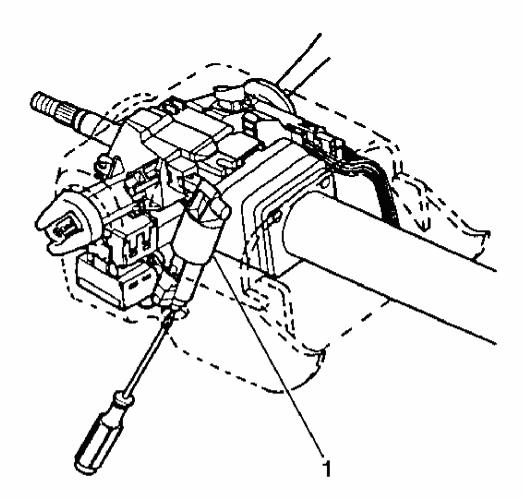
View Of Steering Wheel Theft Deterrent Lock Courtesy of GENERAL MOTORS CORP.
